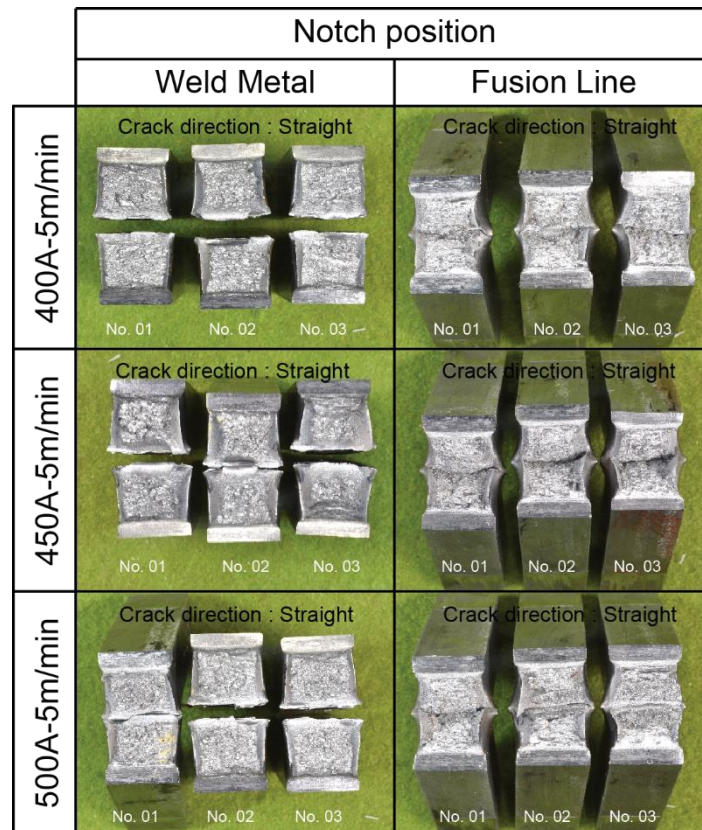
Fracture surface and crack direction of test pieces.
